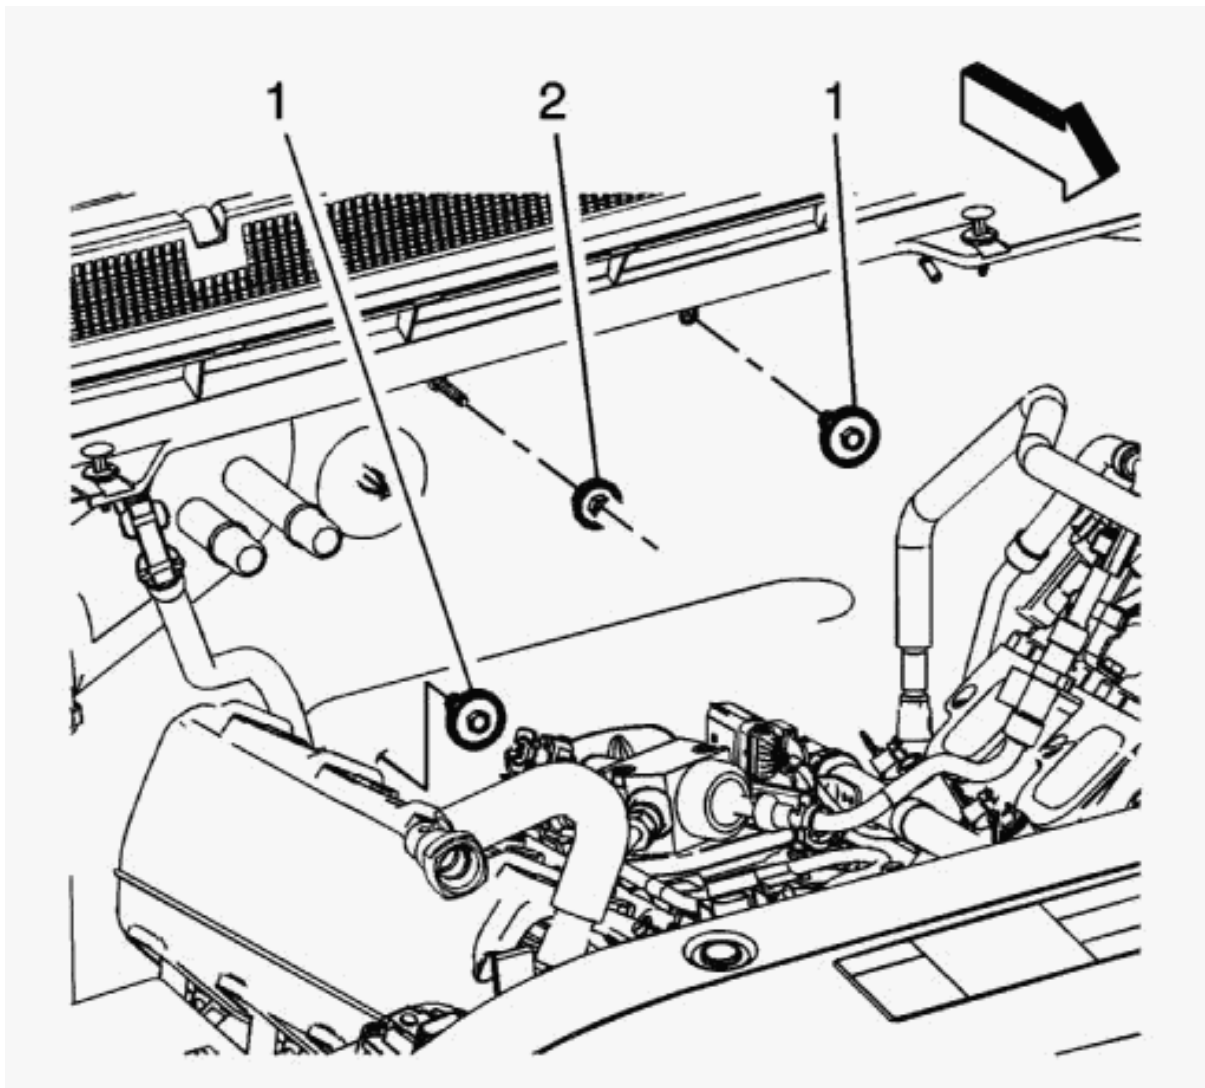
HVAC Module Assembly Bolts And HVAC Module Assembly Nut
